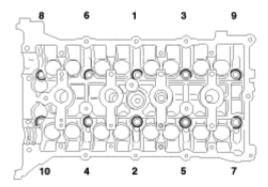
Identifying Cylinder Head Bolts Tightening Sequence Courtesy of HYUNDAI MOTOR CO.
